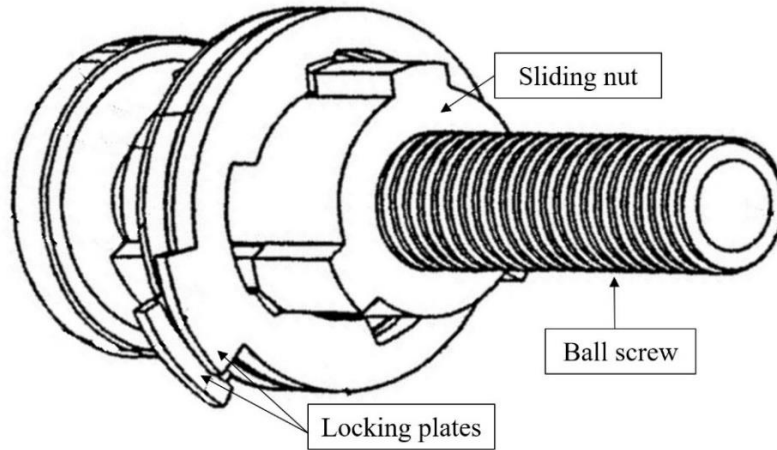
Jam tolerant EMA with locking plate decoupling device [36]
